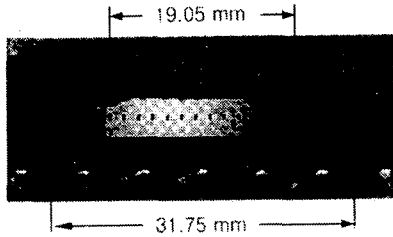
Four-point bending test of WB-PBGA package assembly with moiré grating
